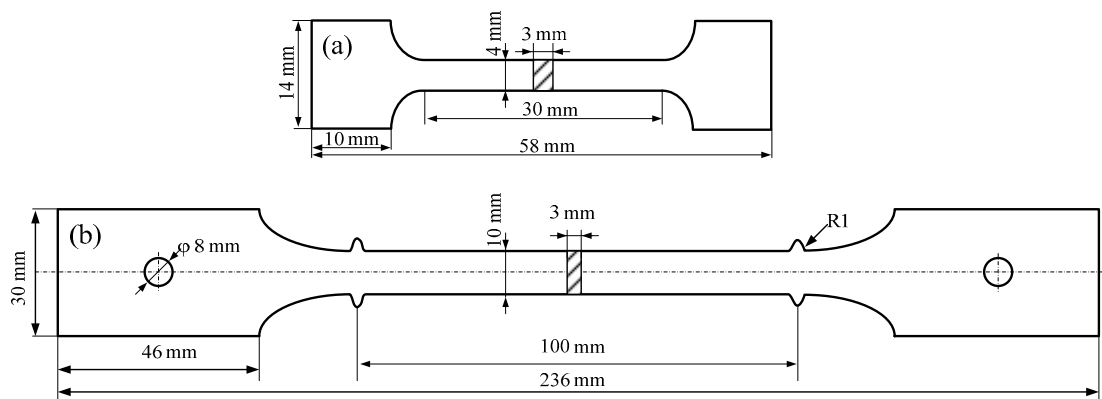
(a) Dimension of tensile specimens; and (b) dimension of creep specimens.
